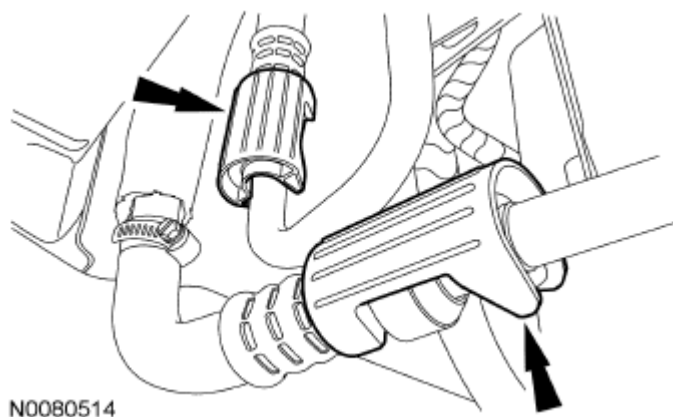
Locating Secondary Latches On Transaxle Fluid Cooler Tubes
